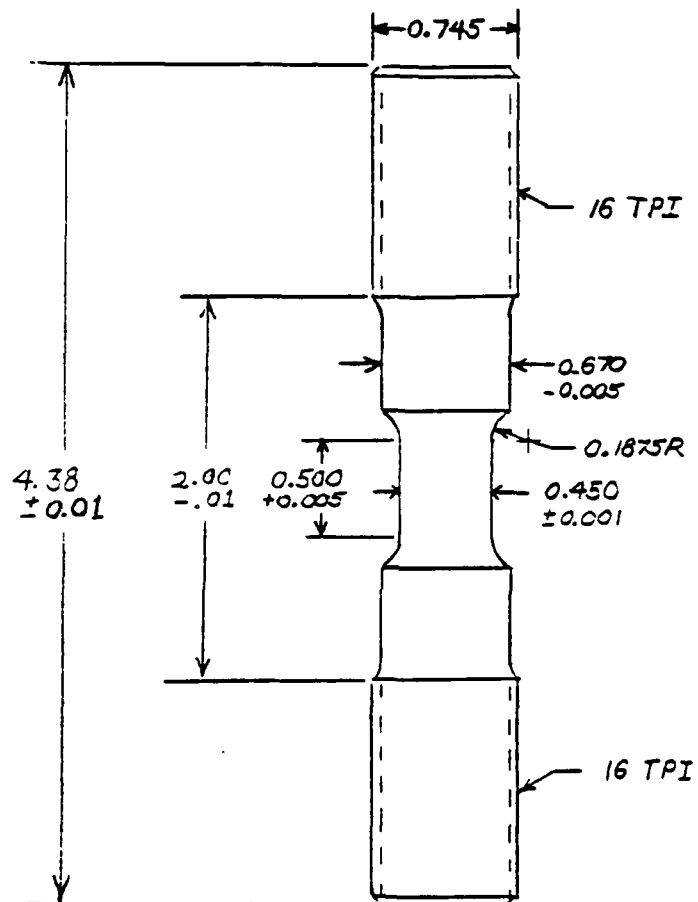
Reverse loading specimen design for 316 s.s. Dimensions in inches.
